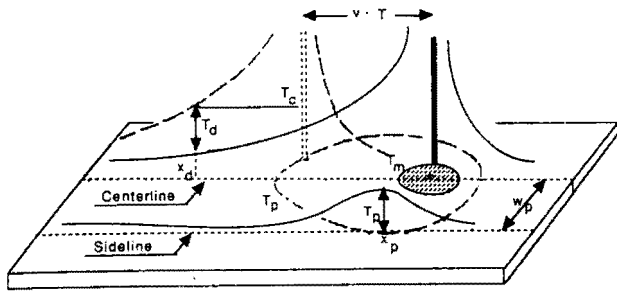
Definition of the welding outputs T_p and T_d
